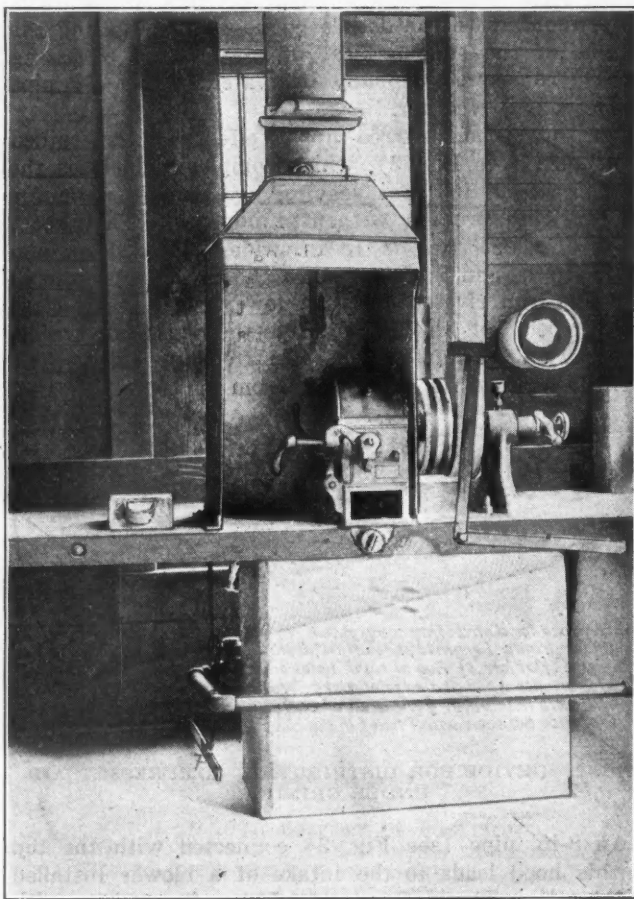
GENERAL VIEW OF GRINDER, SHOWING HOOD
